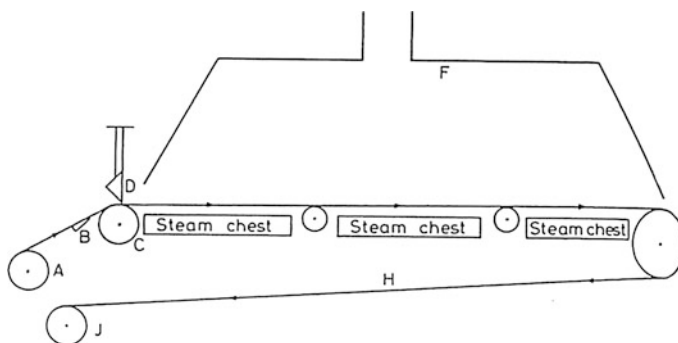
Diagrammatic sketch of spreading machine. Courtesy ICI dyestuffs division
